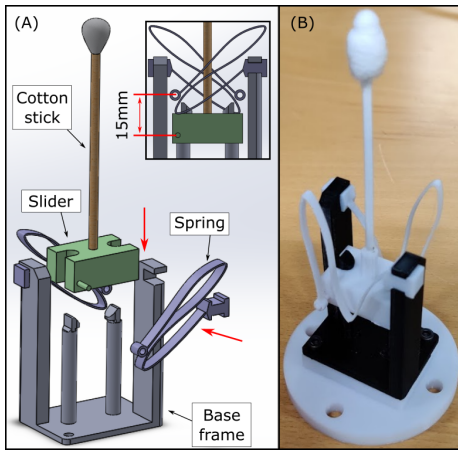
The assembly diagram (A) and the prototype (B) of the mechanism.
